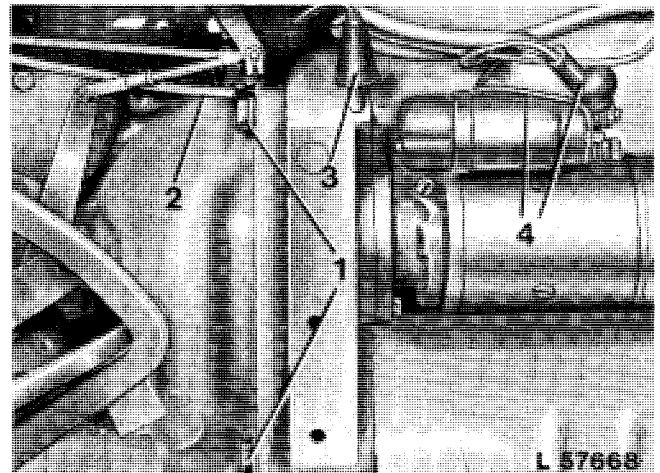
Separating between Engine and Clutch Housing, R.H. Side
